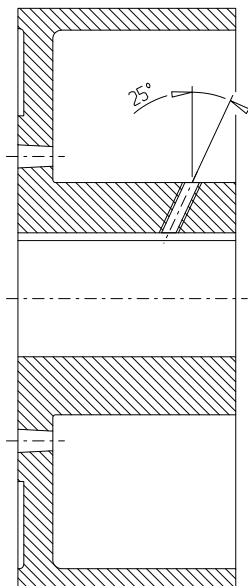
Angular position of the set screw hole in coupling part 3 (brake drum)
